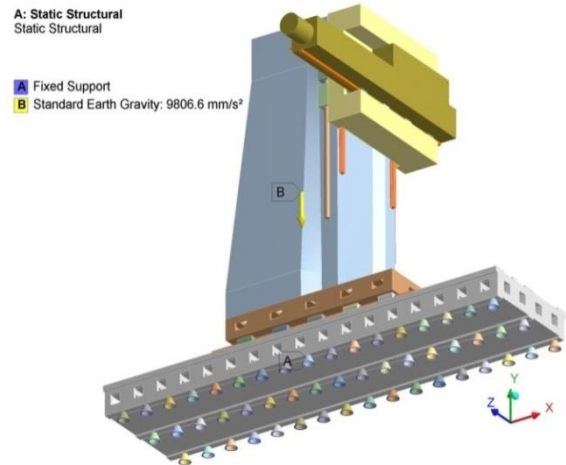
The first version of locking and loading (A – bottom of the shoes, B – force of gravity) of the rack assembly.
